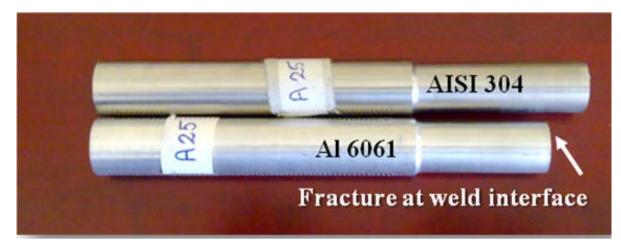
Fracture location for dissimilar at welded sample.
